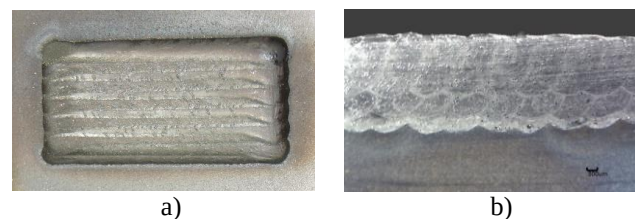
Structure of the three-layer overlay weld: a) face, b) overlay weld macrostructure; substrate – steel S355, overlay weld: 87% Inconel 625, 13% WC
